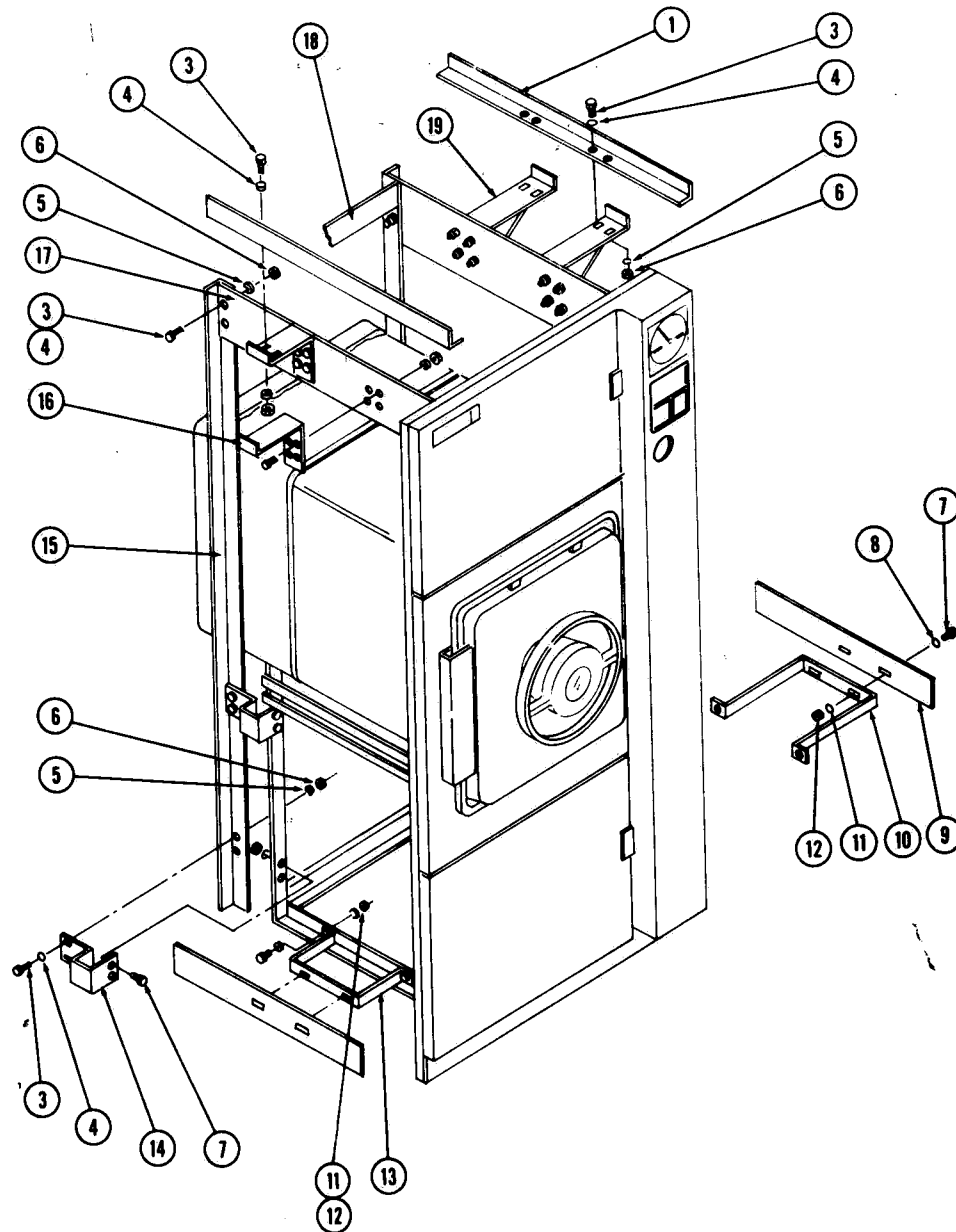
SIDE FRAME ASSEMBLY: Freestanding Sterilizer.
